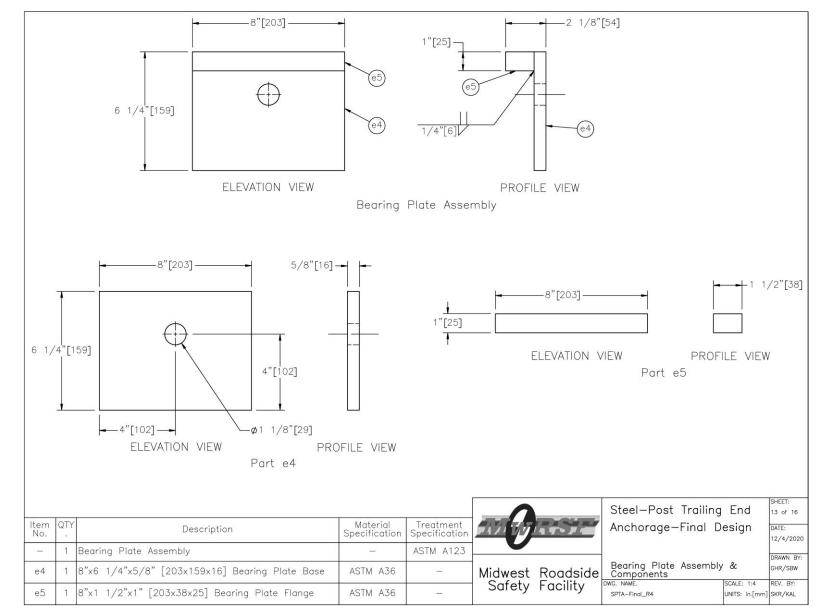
Steel-Post Trailing End Anchorage, Bearing Plate Assembly and Components
